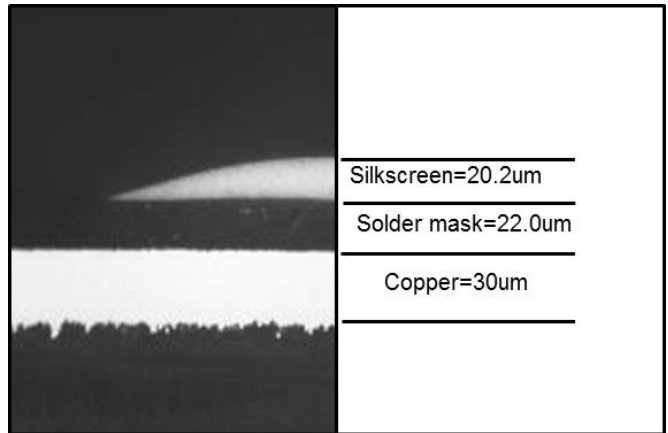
PCB silkscreen on top of solder mask and copper. In this case, the top of the solder mask is 422µm on top of the copper pad.
